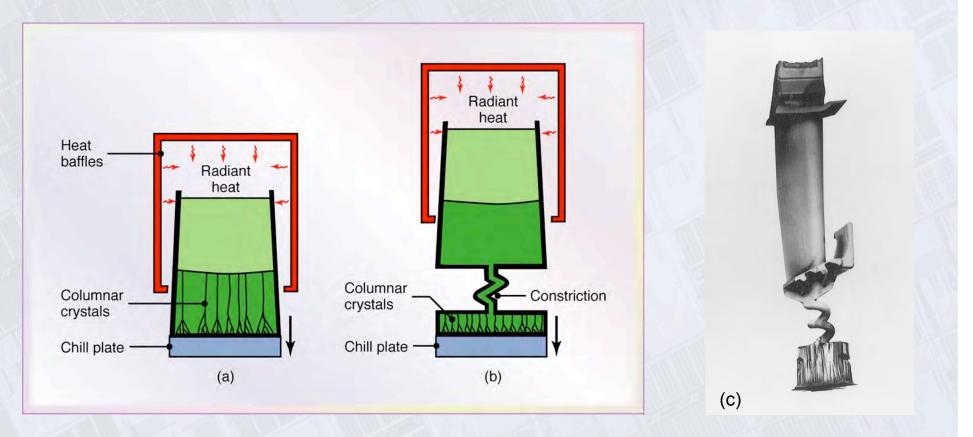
Methods of casting turbine blades: (a) directional solidification; (b) method to produce a single-crystal blade; and (c) a single-crystal blade with the constriction portion still attached. *Source:* (a) and (b) After B. H. Kear, (c) Courtesy of ASM International.
